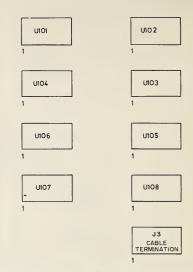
Placement diagram of binary-to-BCD board components.
